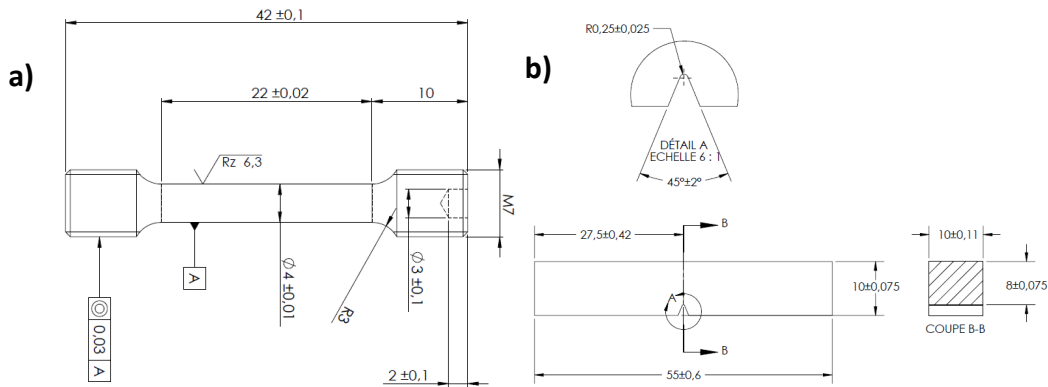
Dimensions of the (a) Tensile test specimens and (b) Charpy V-notch test specimens
